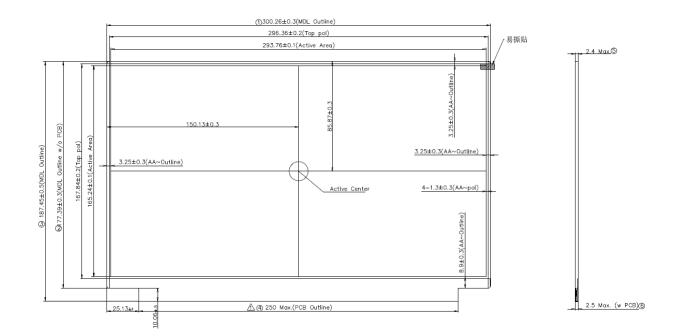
TFT-LCD Module Outline Dimension (Front View)
